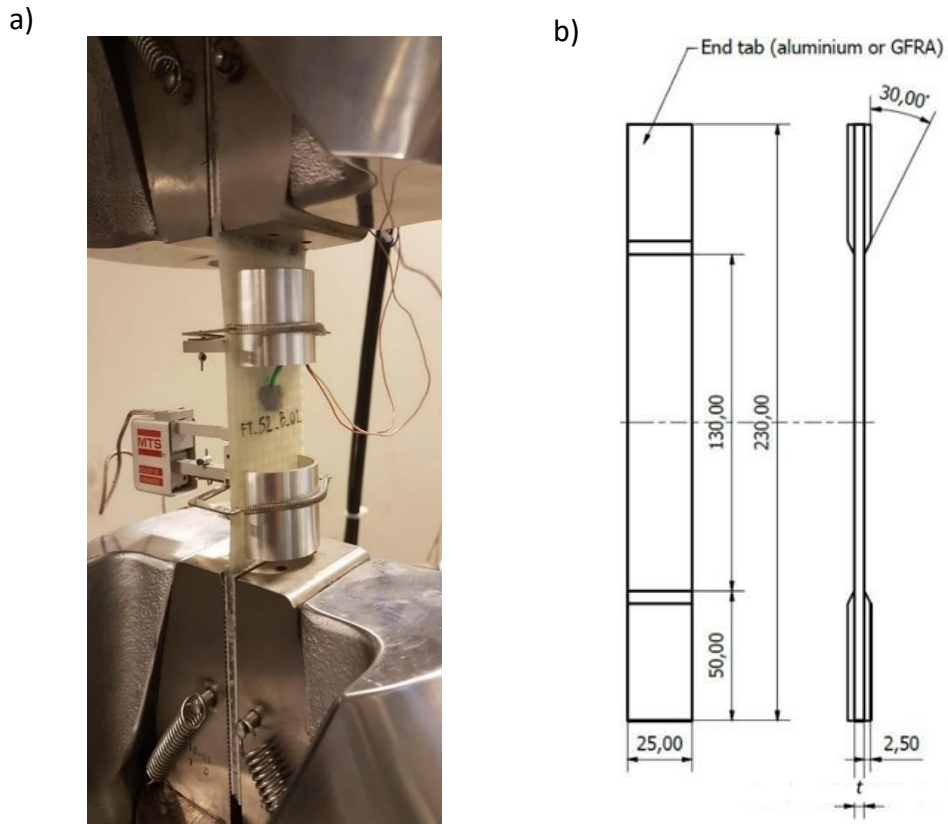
(a) Experimental setup used for tensile tests, (b) engineering drawing of the specimen.
